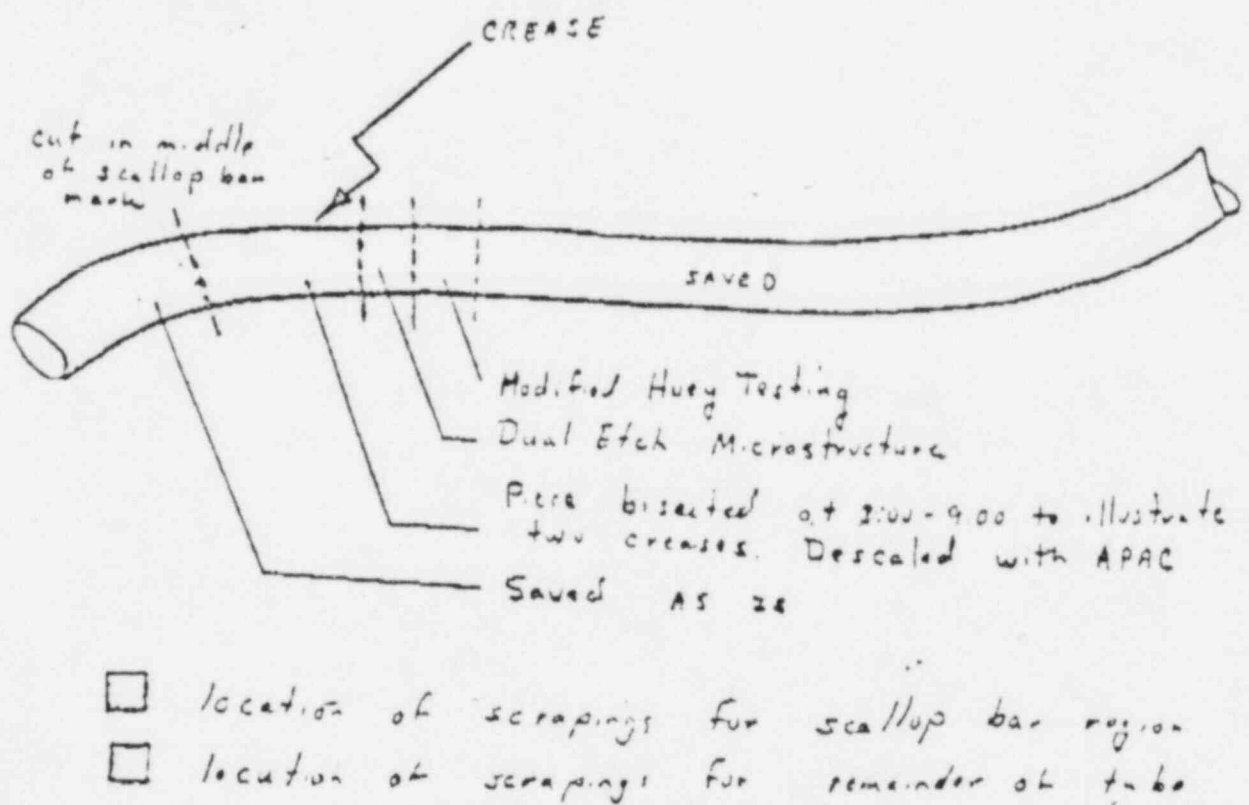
Disposition of Pieces from Tube L29R86, Section 13A
